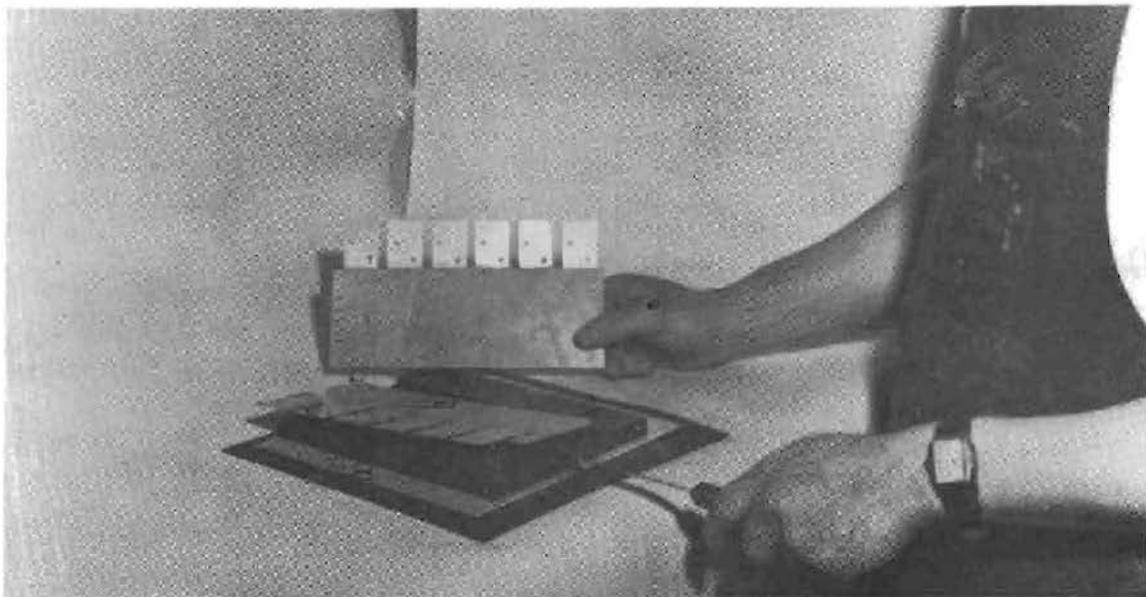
Removing two panels of wood-to-metal joints from jig after gluing in a hot press.
